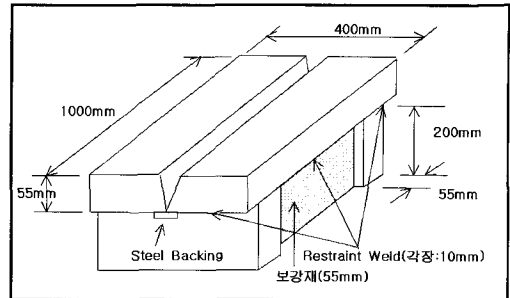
Schematic diagram of a restricted weld specimen
